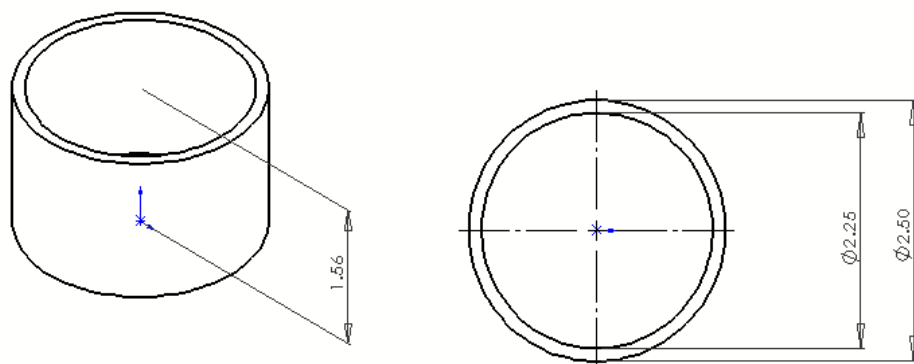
C: Encasing to enclose the inner parts of the fixture.
